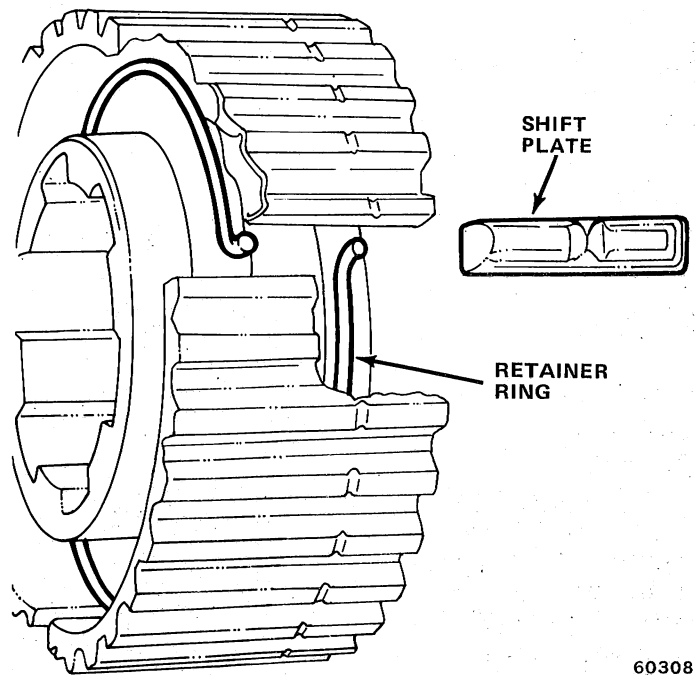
B-73 Third-Fourth Synchronizer Shifting Plate and Retaining Ring Installation
